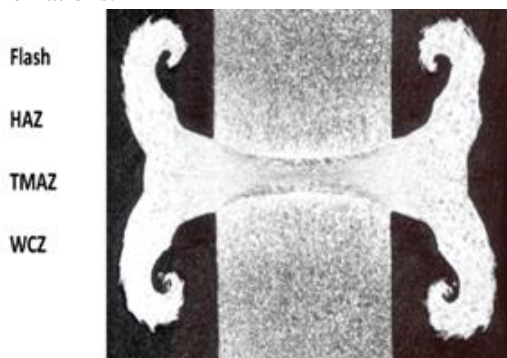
Different Zones of Rotary Friction welds
